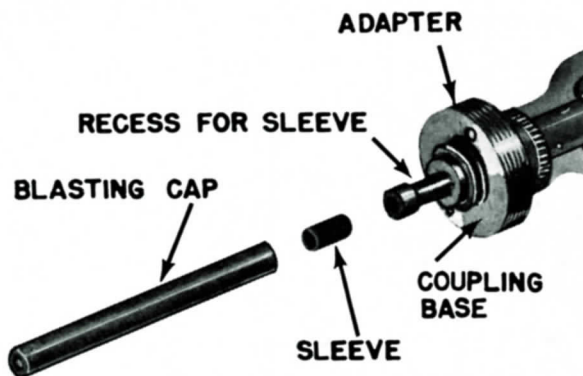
Exploded view showing coupling base, sleeve, and blasting cap.
